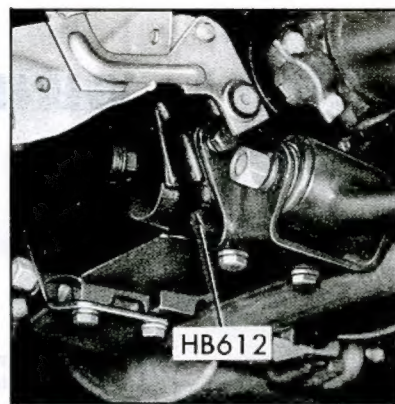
Differential Number Stamped Lower Left Side of Casting
